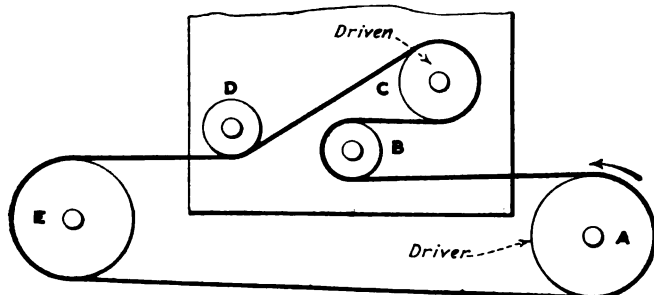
BELT DRIVE WITH IDLE END PULLEY
